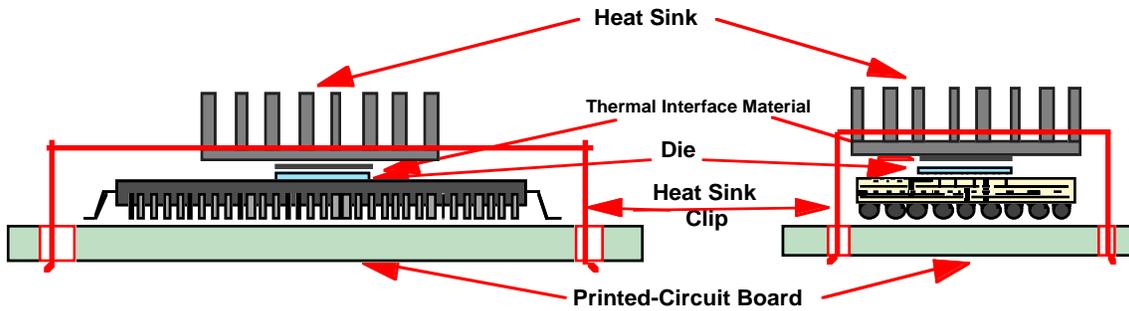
C4-CQFP and BGA Exploded Cross-Sectional View with Heat Sink
